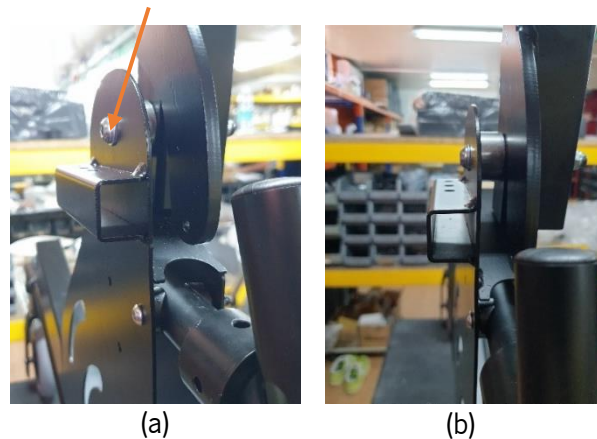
Chassis' lateral metal plate: (a) side view, (b) front view.
